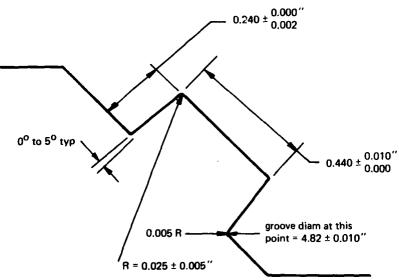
Groove configuration for 0-rings, and lobed rings with anti-extrusion devices in rectangluar groove-angular flange seal systems.
